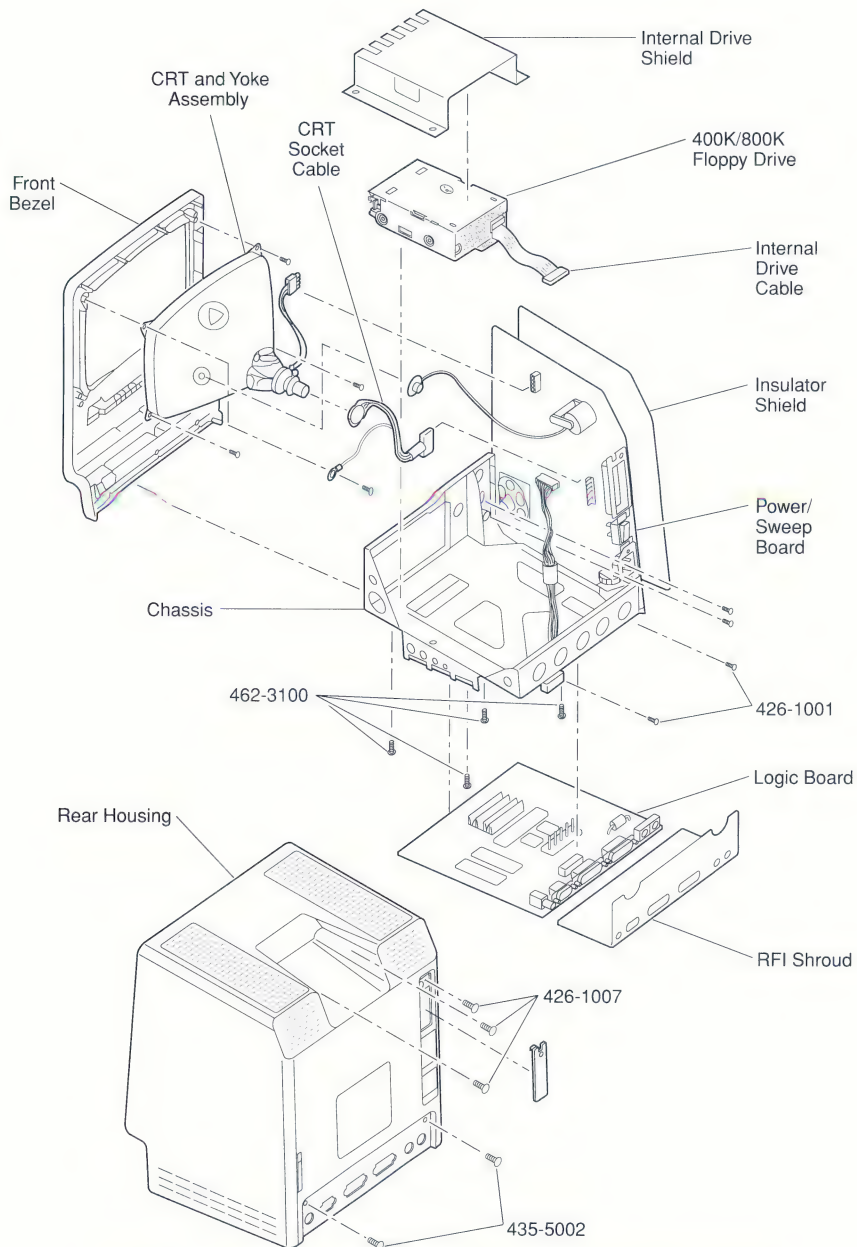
Macintosh 128K, 512K, and Plus Exploded View
